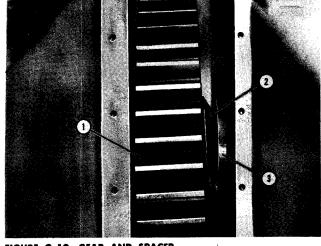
GEAR AND SPACER 1. Gear 2. Spacer 3. Retainer
